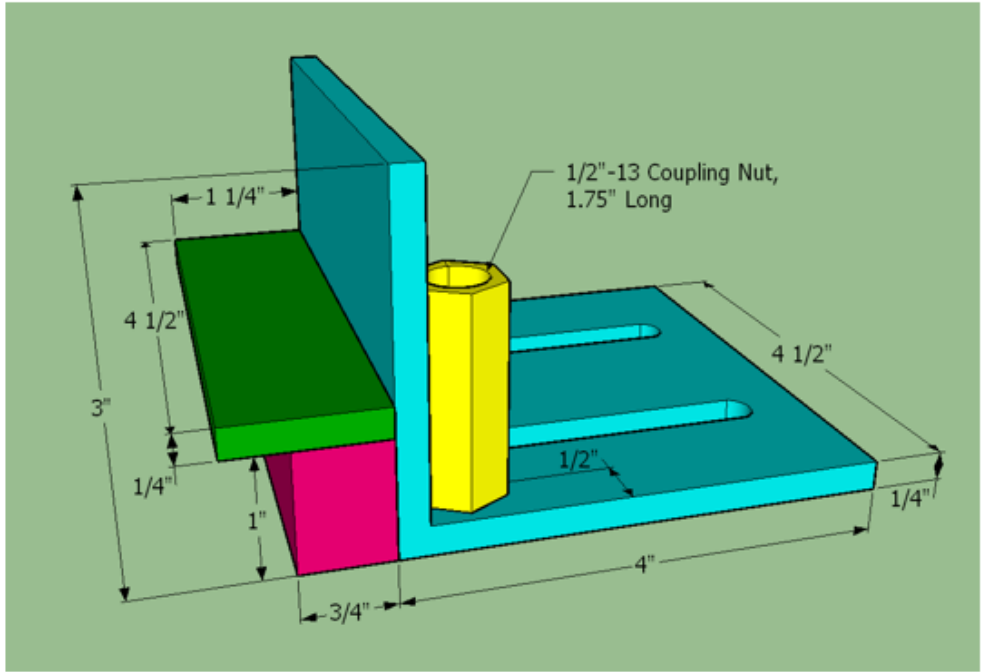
Flanges (F1 & F4)- Sample Holder of Rectangular Specimens.
